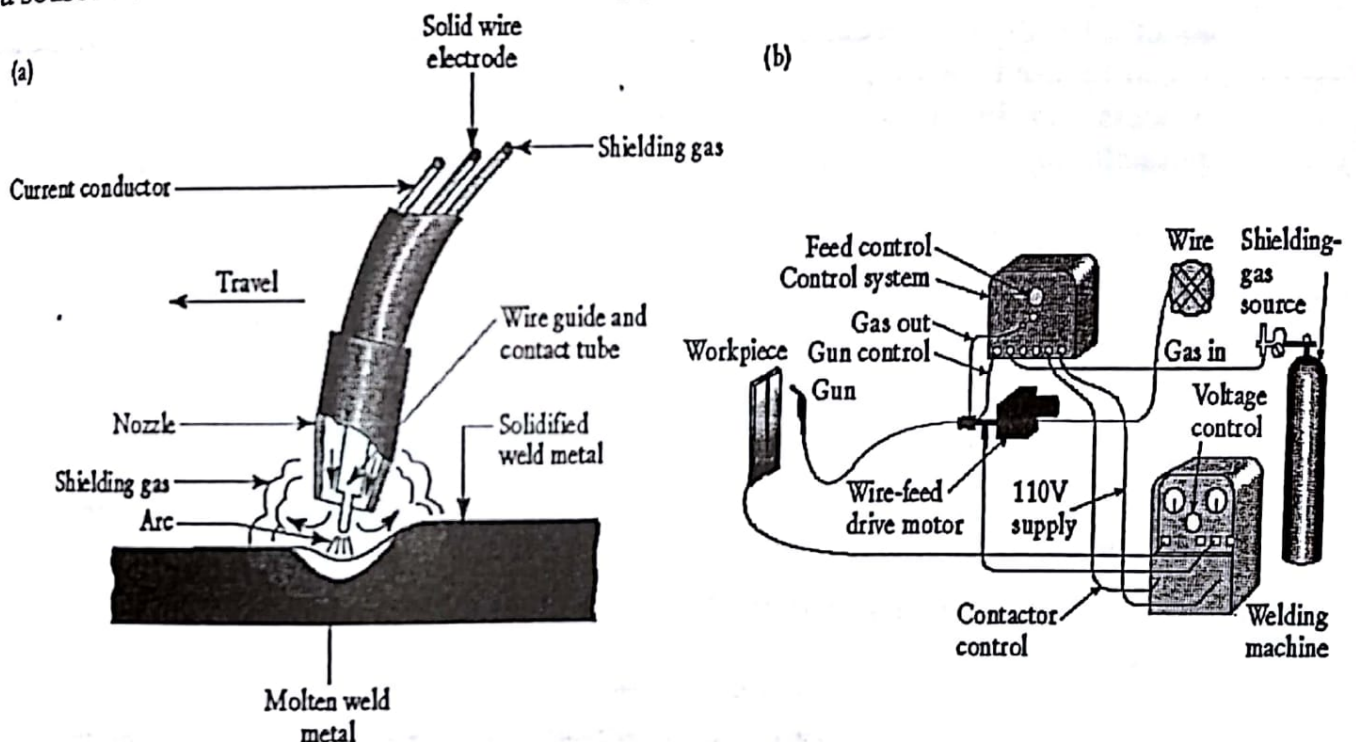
Metal inert-gas welding (MIG)
